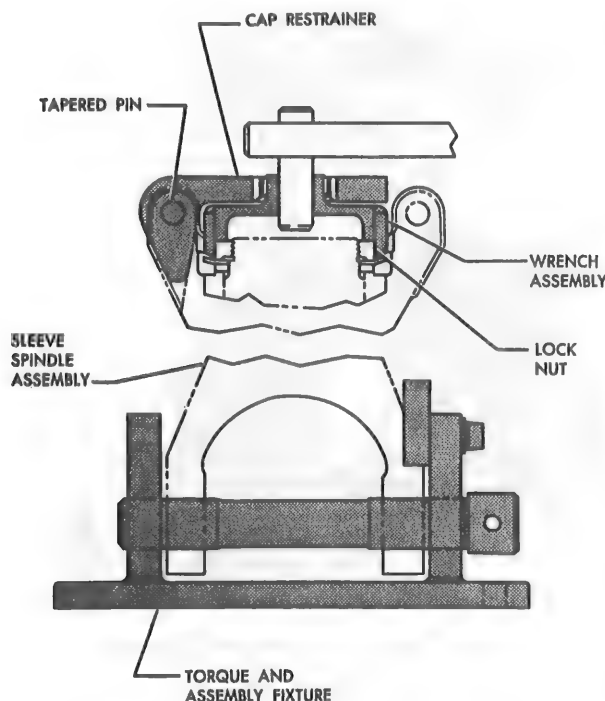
Removing Lock from Sleeve-Spindle Assembly
